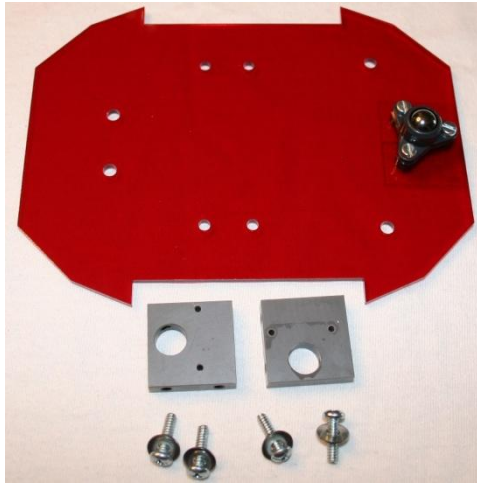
Prepare to Assemble Motor Mounts to Base Plate.
